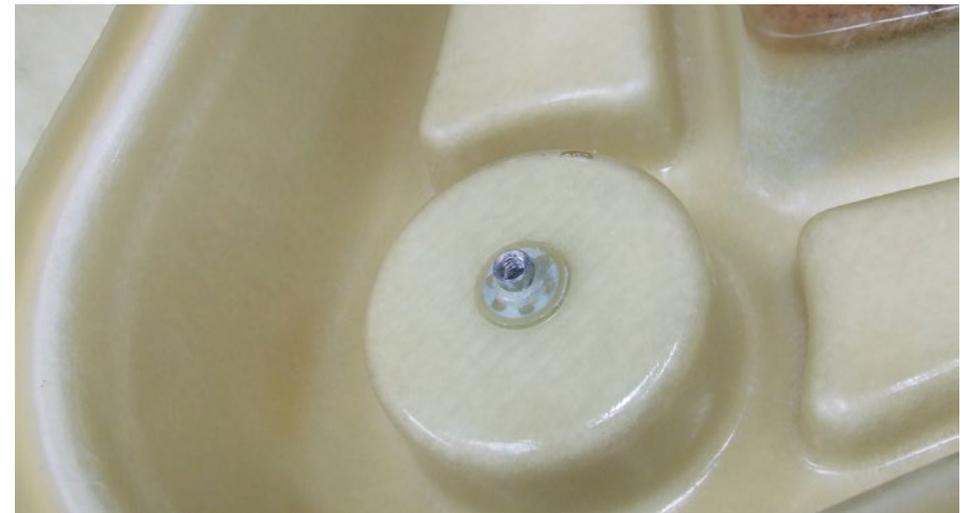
Shows metal thread insert that was moulded into the laminate during infusion.
